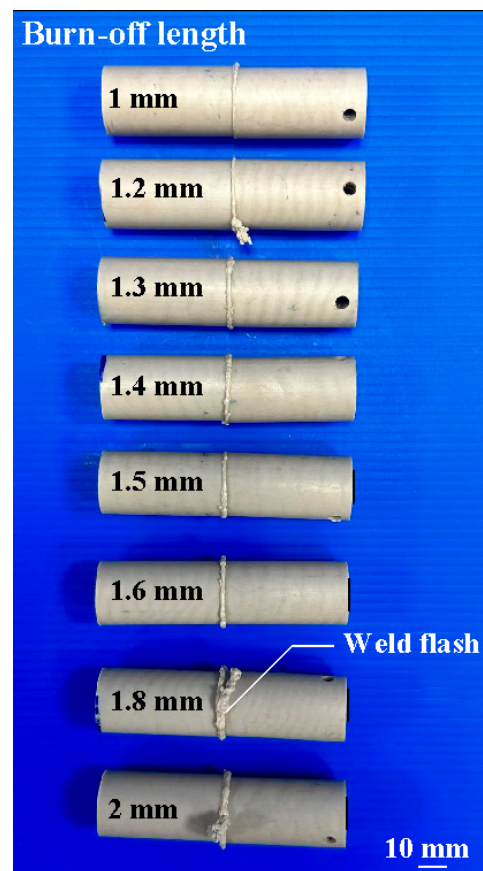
Sets of welded joints under different burn-off lengths.
